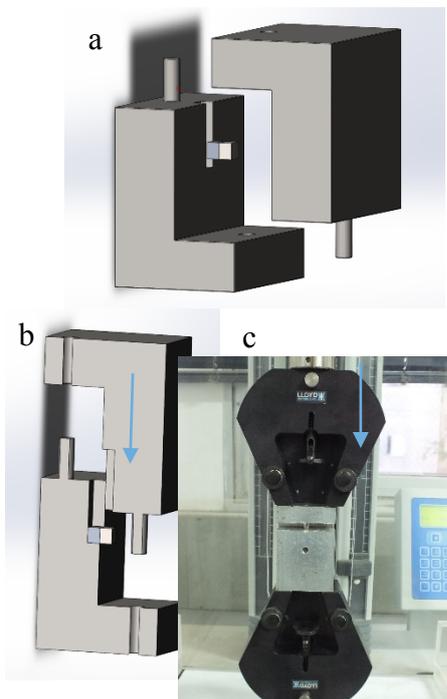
Shear test tools and instrument. a) two identical tool parts and a specimen; b) cross-sectional view of the shear test showing movement of the upper part down towards the specimen mounted on the static part; c) tool mounted into the testing instrument during the shear test.
